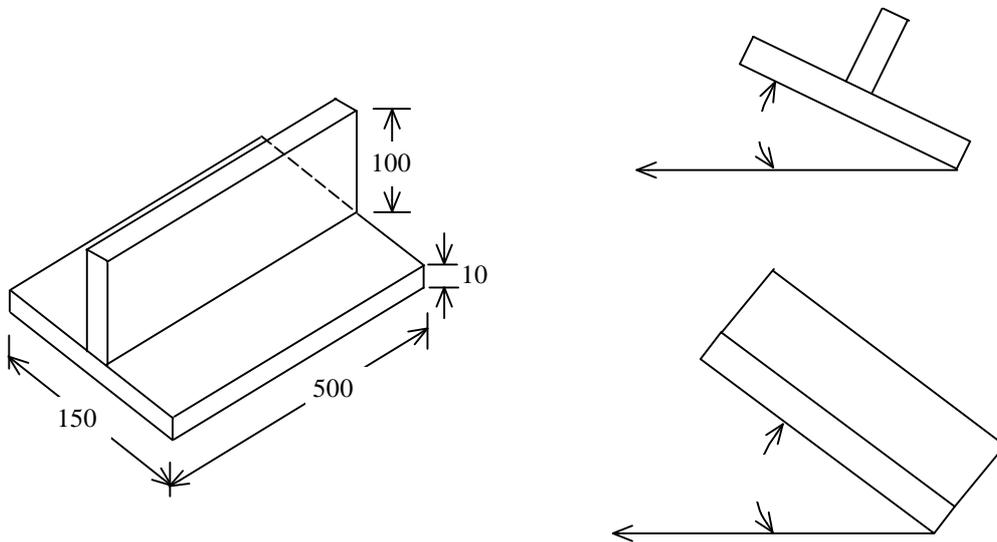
Fig. 2.4 Detail of welding specimen
